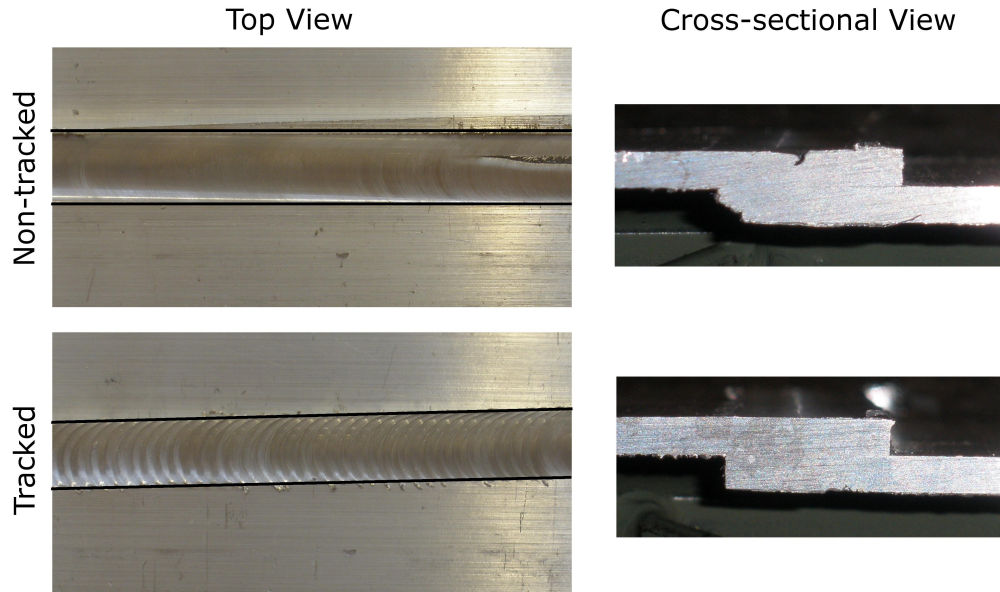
Comparing Tracked and Non-Tracked Welds Given Changing Center Position
